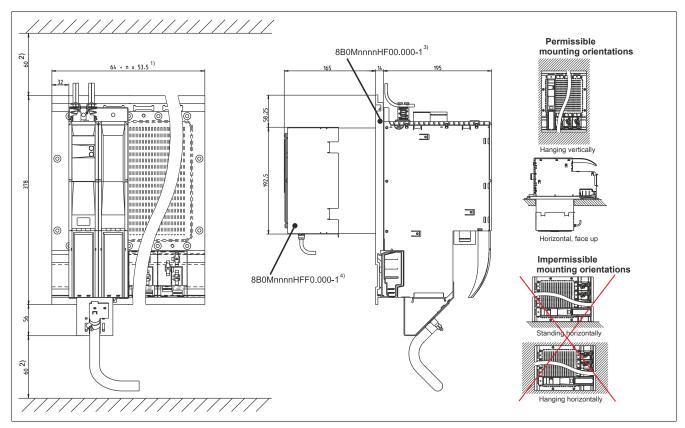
Feed-through mounting - Dimension diagram and installation dimensions
